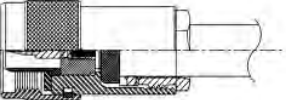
Connector component; and below Table 1-1: Connector Assembly
